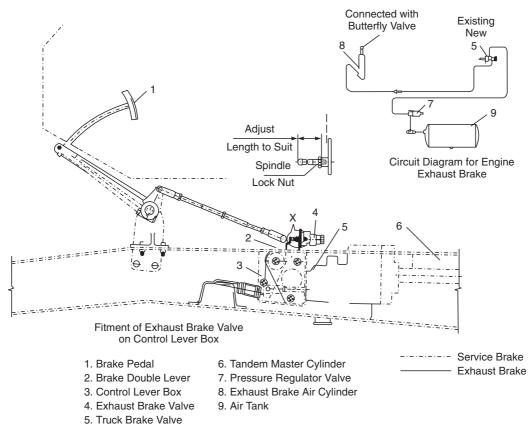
Engine Exhaust Brake Coupled with Service Brake
